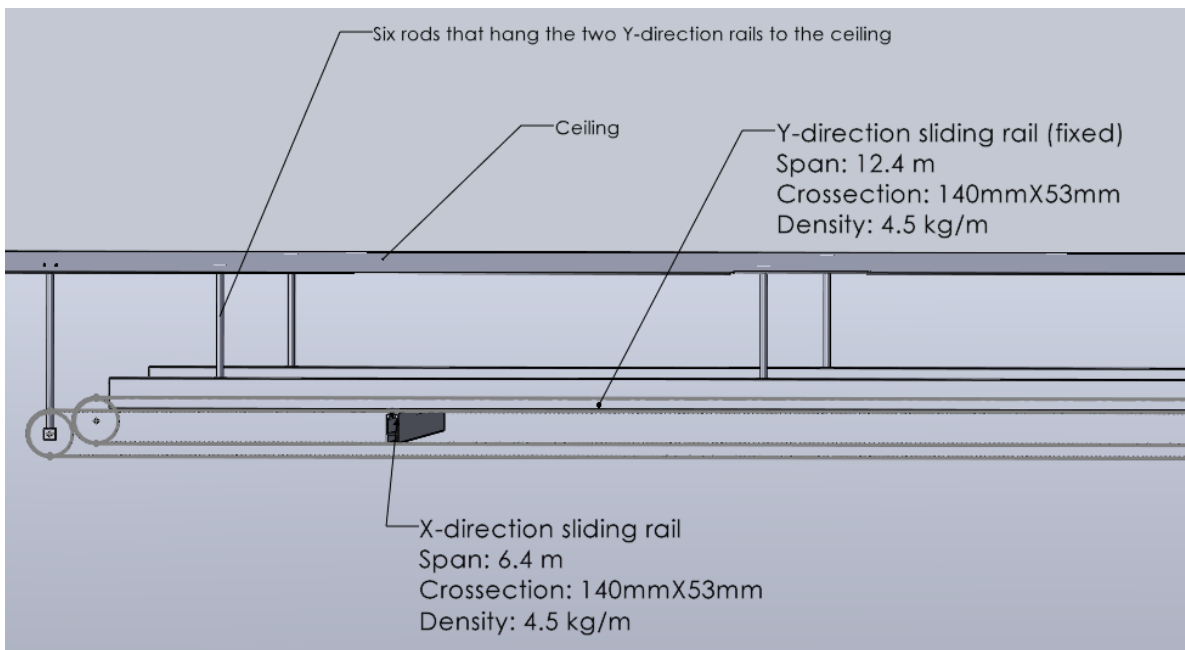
The six rods connect the gantry rail to the ceiling for support.
